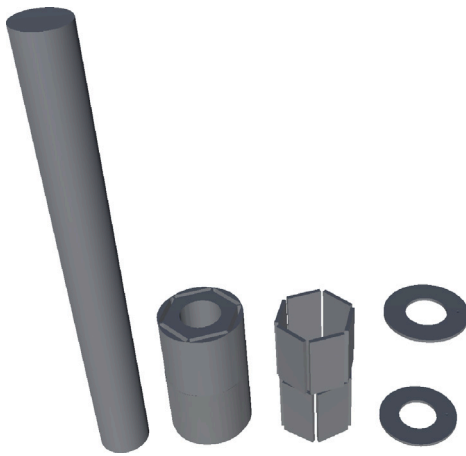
CAD models of the components imported by the manufacturer to produce the shaft and rotor sub-assembly: round bar, laminated rotor stack, magnets, and end covers.
